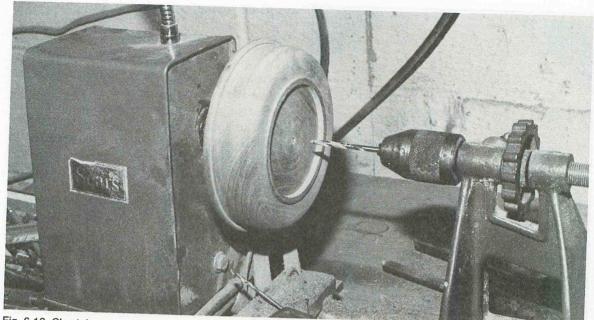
Chuck is mounted on tailstock for drilling.
